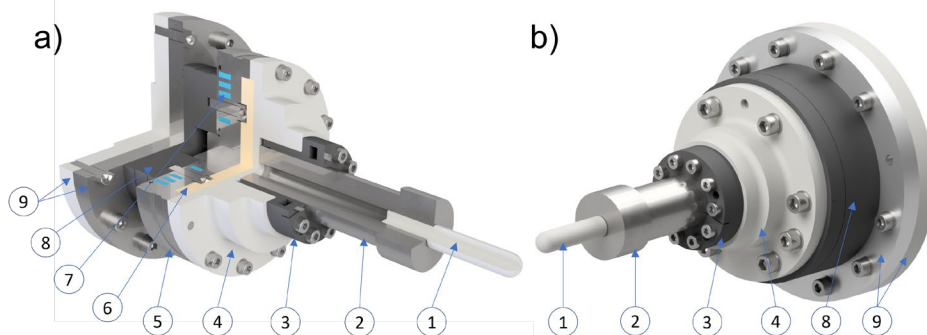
Forming tools a) hot side tool with cooling coupler b) cold side tool consisting of: 1) tool-tip, 2) collet chuck, 3) locking assembly, 4) root connector, 5) cooling coupler with 6) insulation chamber and 7) coolant channels, 8) six-axis load cell and 9) adapter plates
